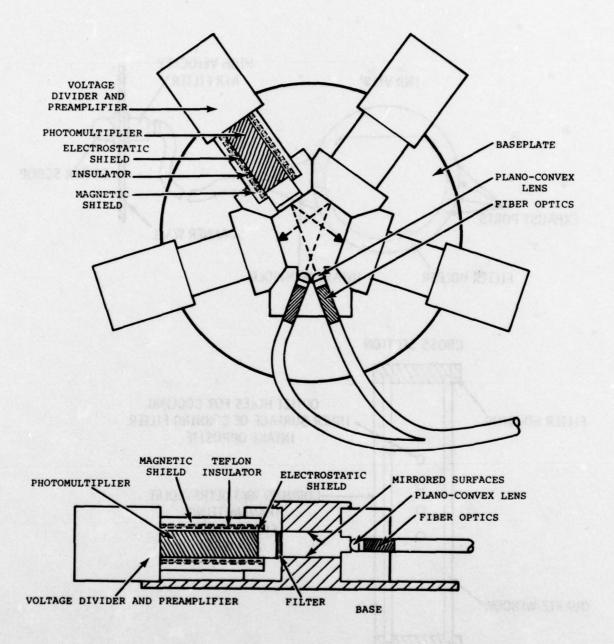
Four-Channel Detector Assembly. The Upper Drawing Shows the Interior of the Assembly and Details of One Detector Housing. The Lower Drawing is a Cross Section of the Assembly.
